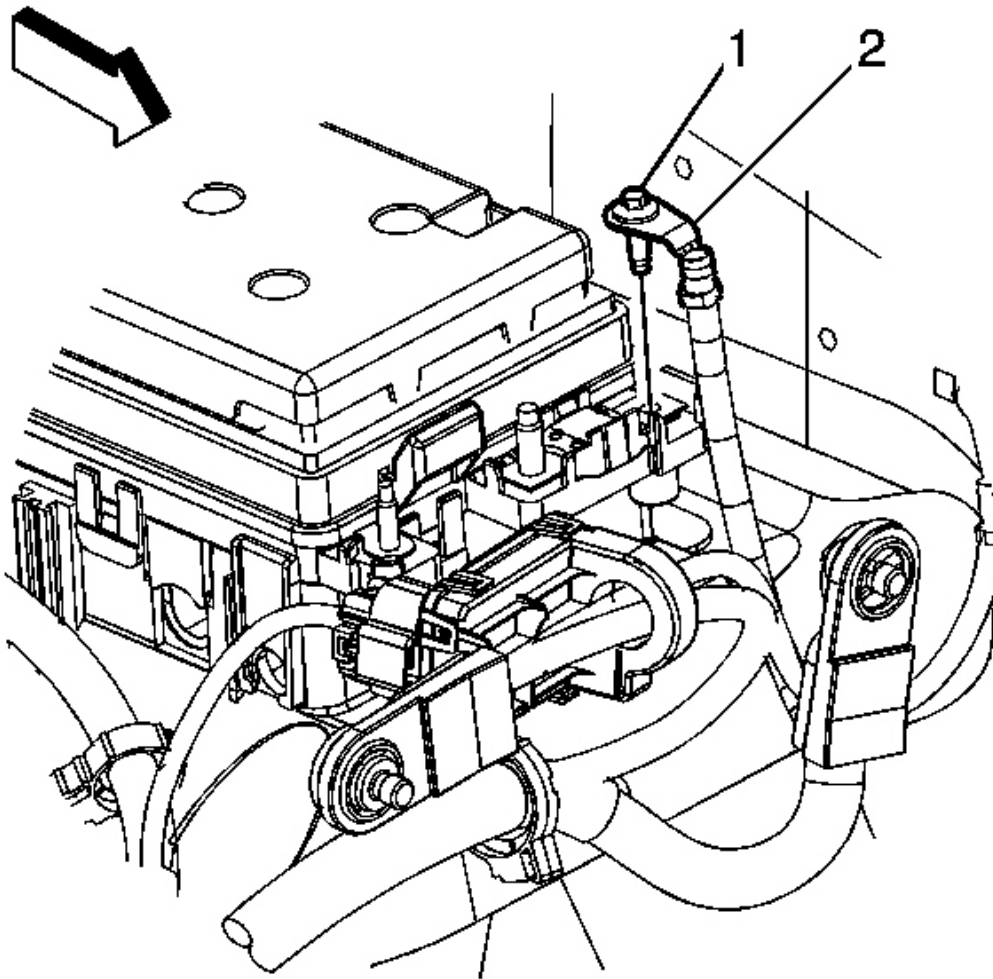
Locating Positive Battery Cable Terminal Bolt & Junction Block
